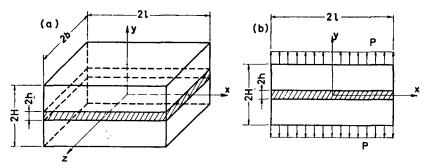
Adhesive joint under uniform load (rupture mode). (Schematic).
